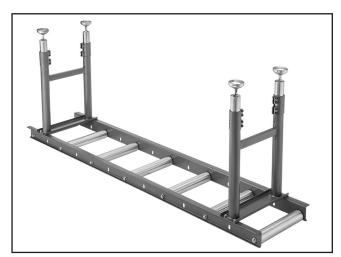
Turn roller table over to adjust leg height (T28369 shown).
